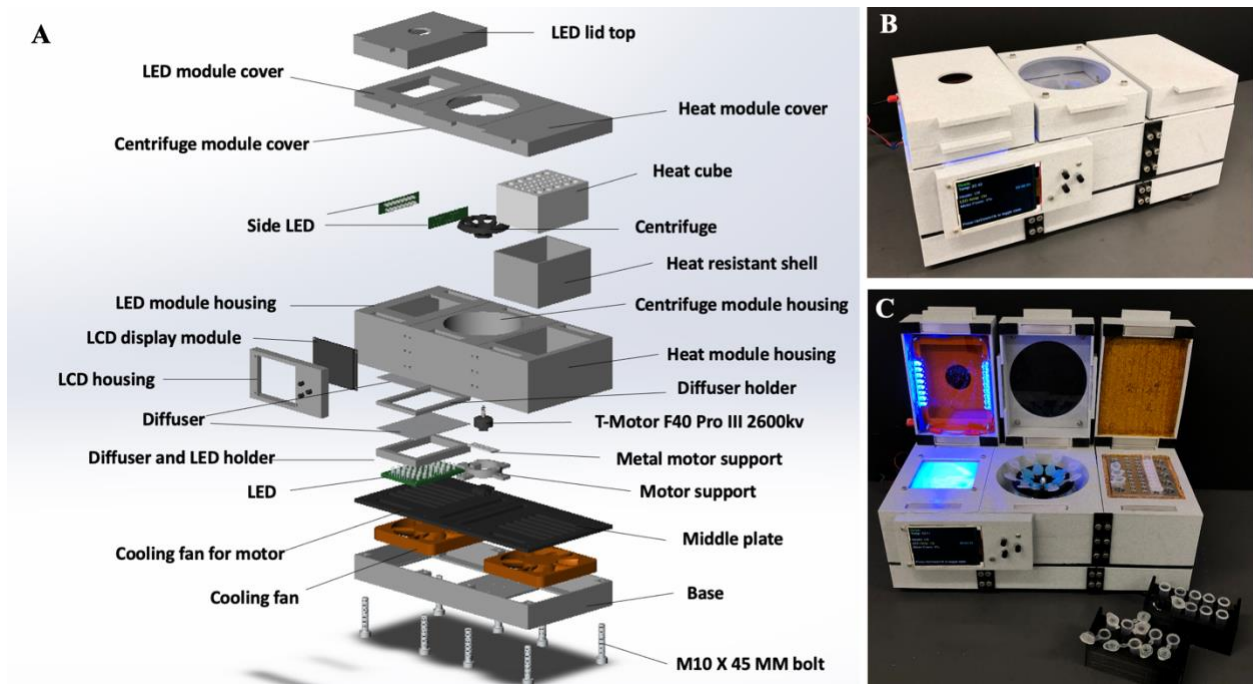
(A) Exploded view of the developed device. (B) and (C) Photographs of the fabricated device [55].
